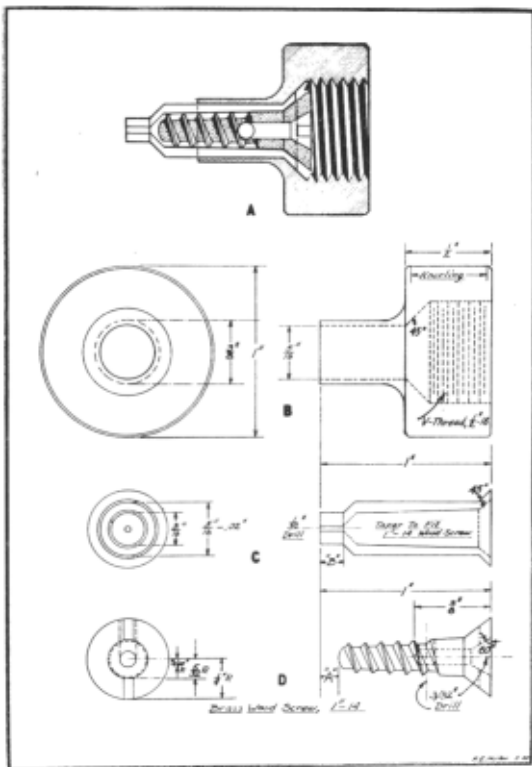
Details of construction of nozzle shown in Figure 3. A, Complete assembly; B, outer, knurled holder; C, hollow aperture shell; D, modified wood-screw.
